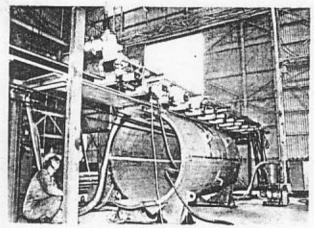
Local vacuum EB welding equipment for long welds (linear type, max. weld length = 6 m)
